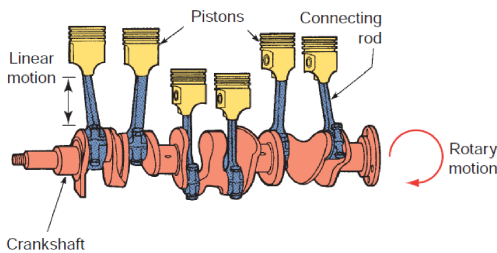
The linear (reciprocating) motion of the piston is converted to rotary motion by the crankshaft (အထက်အောက်ရွေ့နေသောအရွေ့ကနေ လည်ပတ်နေသောအရွေ့ကို ပြောင်းလဲရန် ကရိုင်းရှပ်ကို အသုံးပြုပါသည်)
